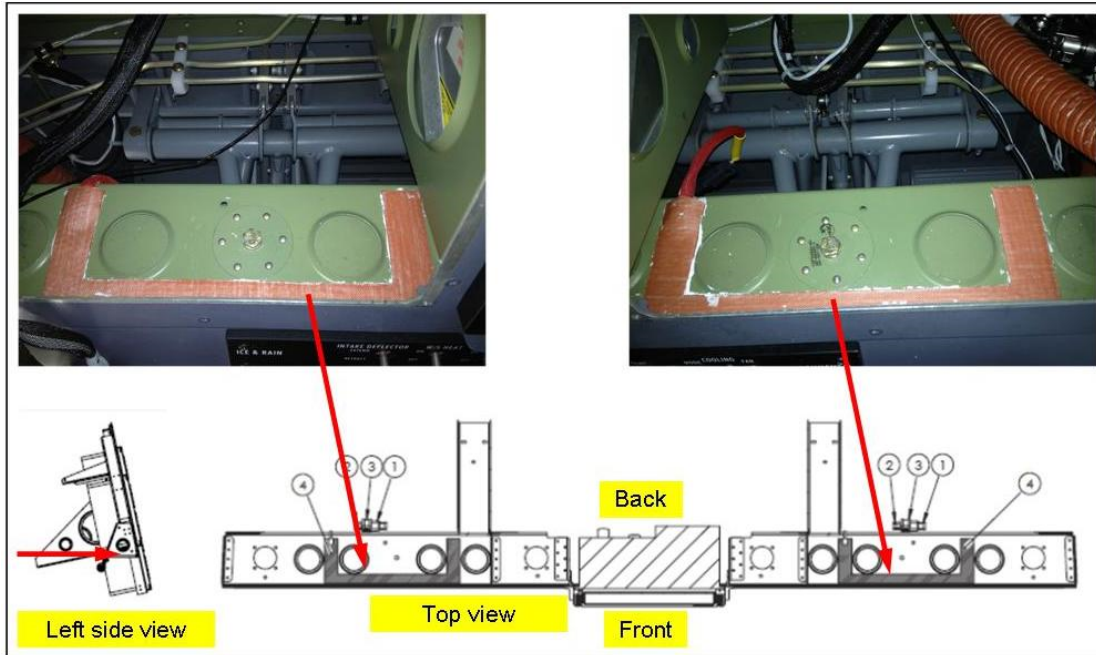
DHC-6-400 instrument heat configuration: Two panel heat elements, TEP2970-. Locate on top surface of the avionics frame below PFD and MFD, with bonding sealant. Suggest locating connectors with existing wiring or with clamps as shown, Items 1, 2 and 3. Refer to Tanis drawing 02978. Optional AV/Cabin Heaters, refer to Figure 7.
